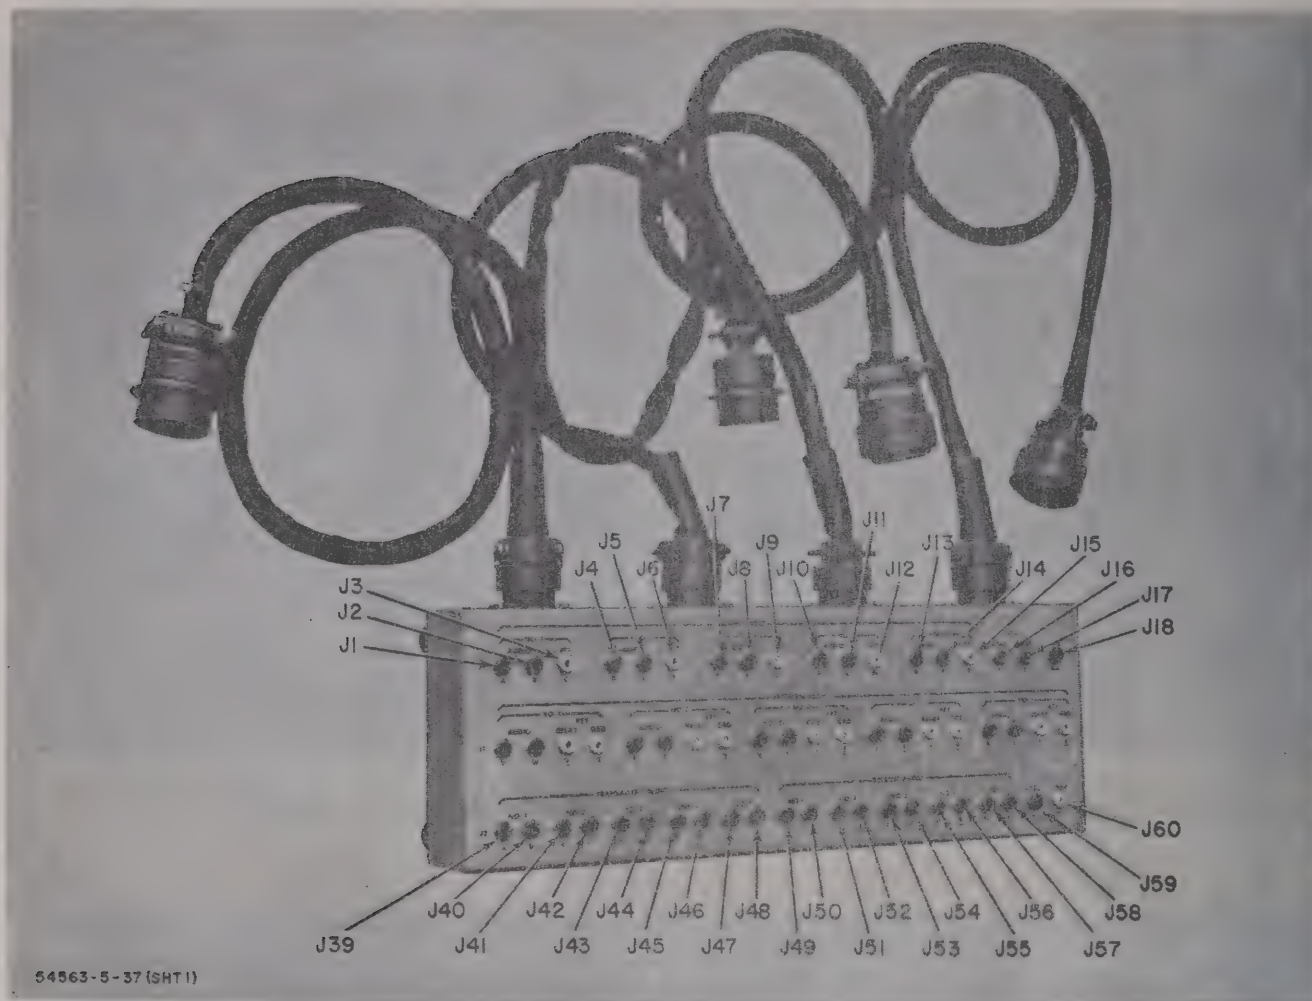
Test Adapter, MX-8158/TYA-11, Part Location (Sheet 1 of 2)
